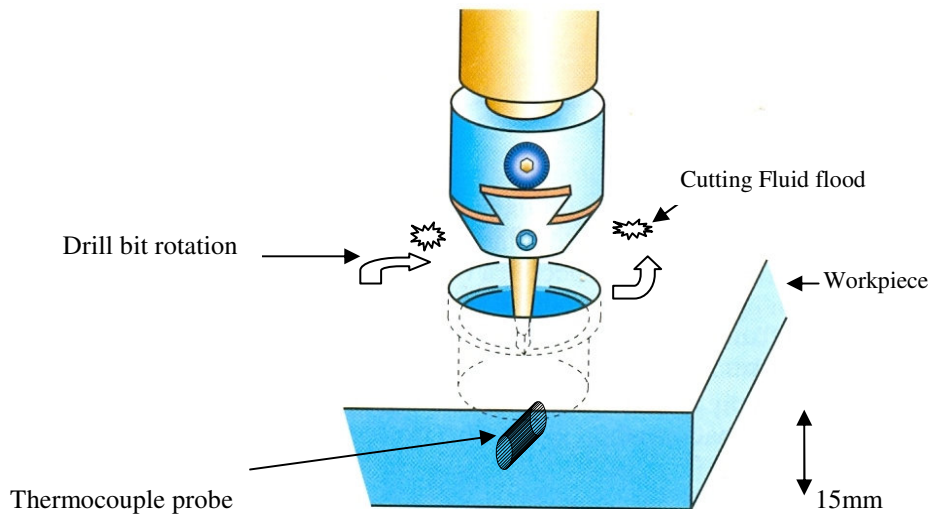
Schematic drawing of the drilling operation with a thermocouple embedded.
